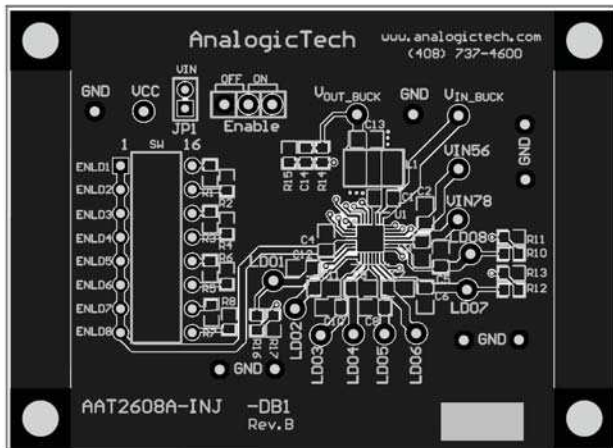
AAT2608A Evaluation Board Top Side PCB Layout.
